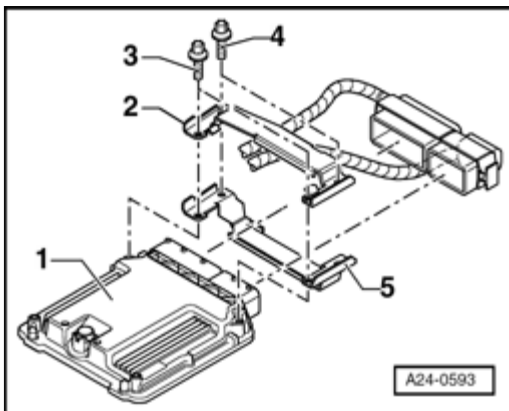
Removing Protective Housing From Engine Control Module (ECM) J623
